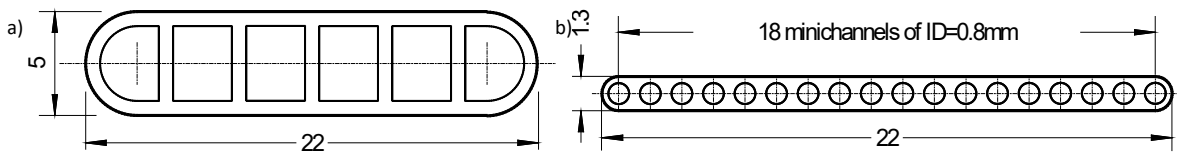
The multiport extruded aluminium tubes: a) tube with square channels of medium size; b) tube with round minichannels
